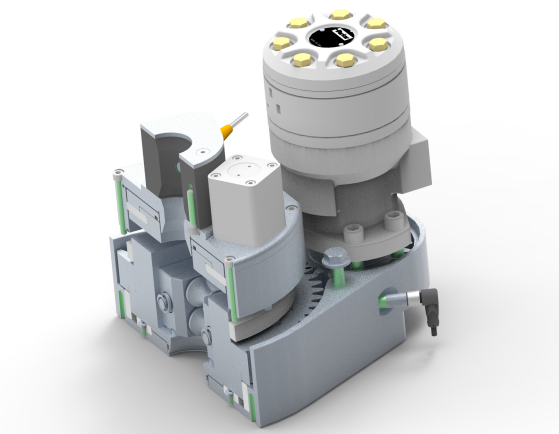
Raptor With Clamping Blocks Model Section View.
